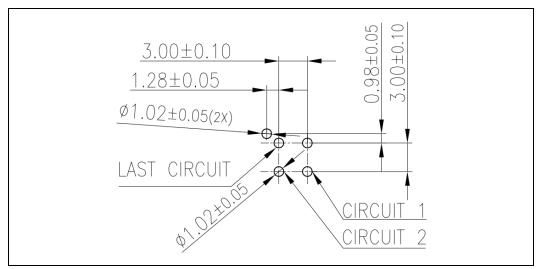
3 mm SATA Power 4 Pin MB Header – Recommended PCB Layout (Top Layer View)
